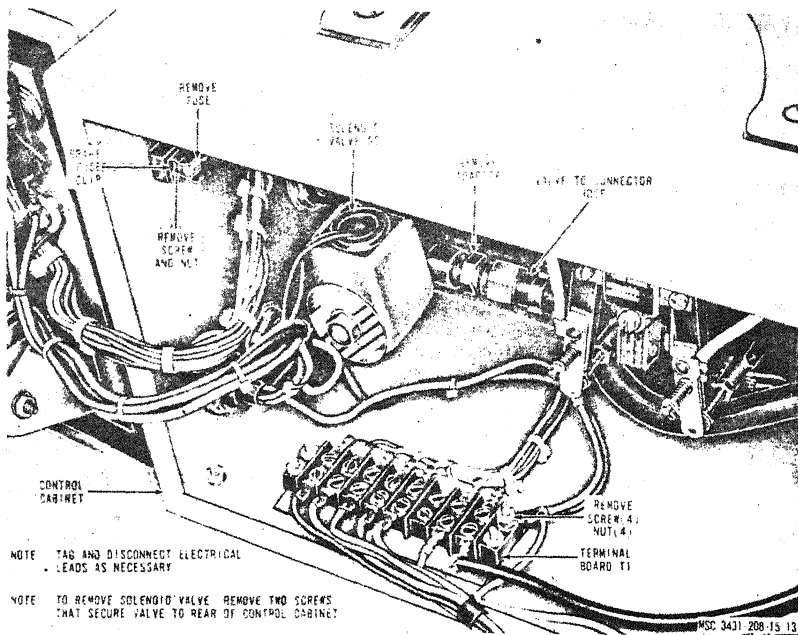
Solenoid valve, control assembly terminal board, spare fuse clip, and valve-to-connector hose, removal and installation.
